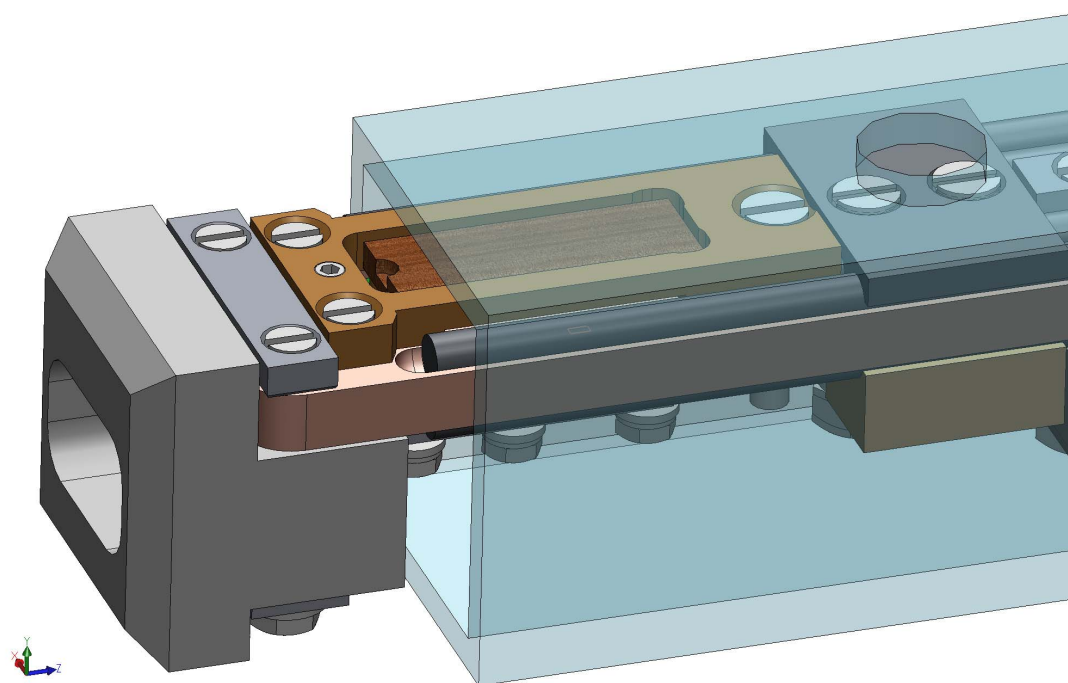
3D CAD rendering of the Octopus lower end, top face. The blue rectangular prism represents the cryostat bottom bore, and the sample itself (represented by the piece of wood) would be aligned under the cryostat window hole.
